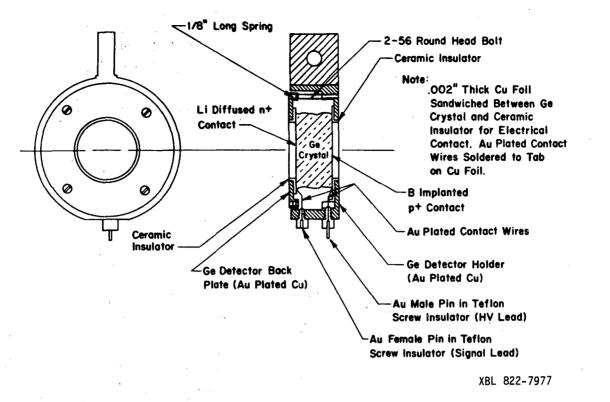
Assembly drawing of the Indiana germanium detector mount.
